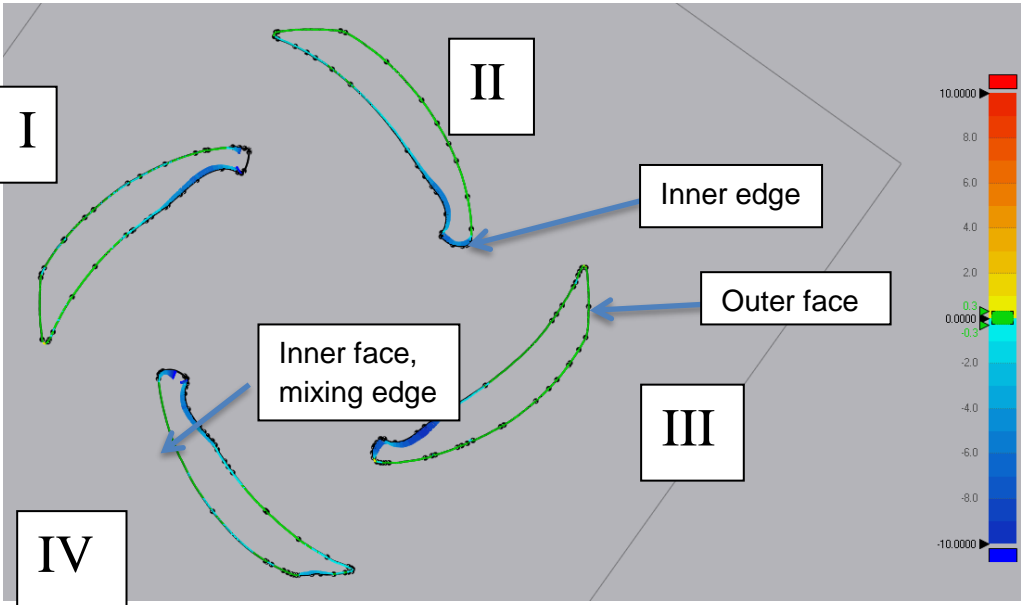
Individual impeller blades' wear dimension shown between -10mm to +10mm
